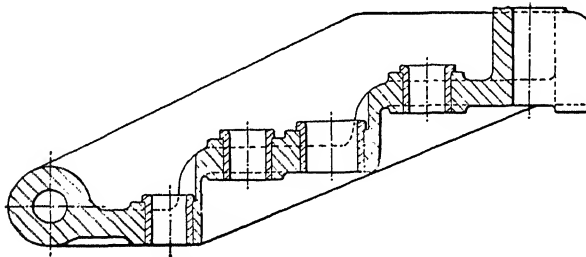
Hinged Cover for a Fixture containing Four Drilling Bushes at different Heights
